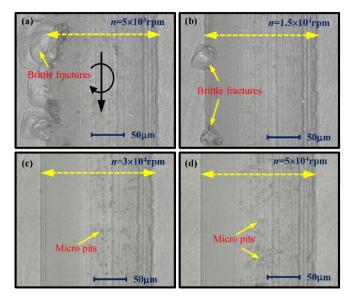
Morphologies of micro groove surface at different spindle speeds of up-milling
